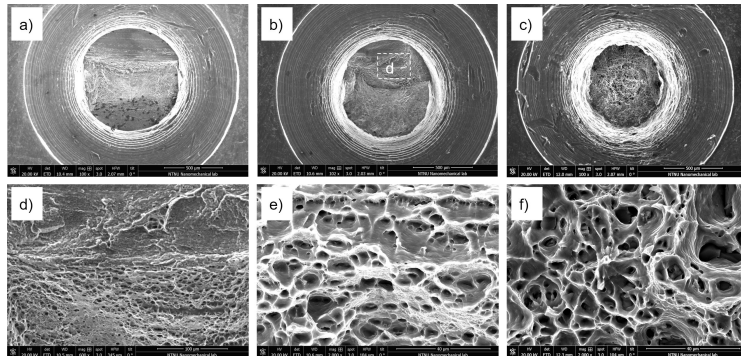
SEM fractographs of fracture surfaces from three broken specimens. The corresponding tensile test results are plotted in Fig. 11; (a) Fracture surface of specimen B3; (b) Fracture surface of specimen B4; (c) Fracture surface of substrate specimen S1; (d) Mixed region with kissing-bond and dimple formation in specimen B4; (e) Dimpled fracture surface observed in specimen B3, and; (f) Dimpled fracture surface observed in specimen S3.
